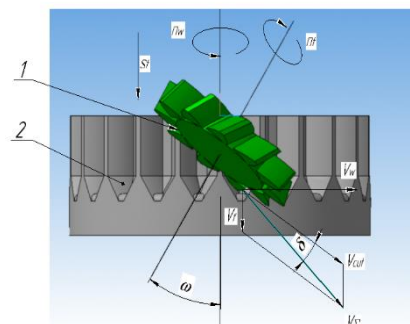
Overview of the external ring gear cutting process on machining center for the Power skiving process
